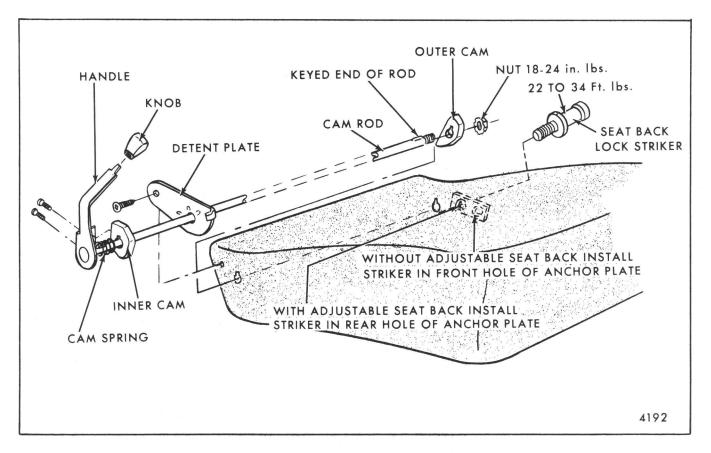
Adjustable Driver's Seat Back Handle, Cams, Cam Rod, Detent Plate and Spring Removal and Installation from Seat Cushion - Chevrolet "F and H" Styles
